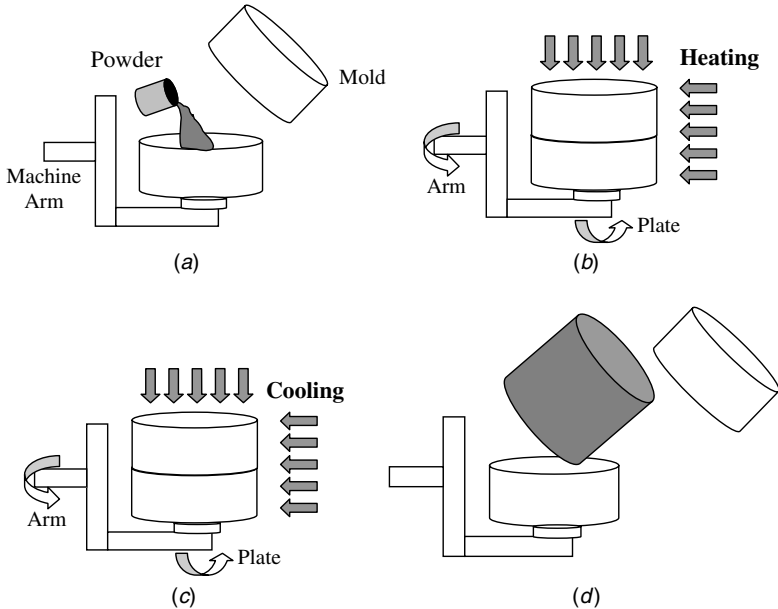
Four basic steps of rotational molding: (a) loading; (b) heating; (c) cooling; (d) unloading.
